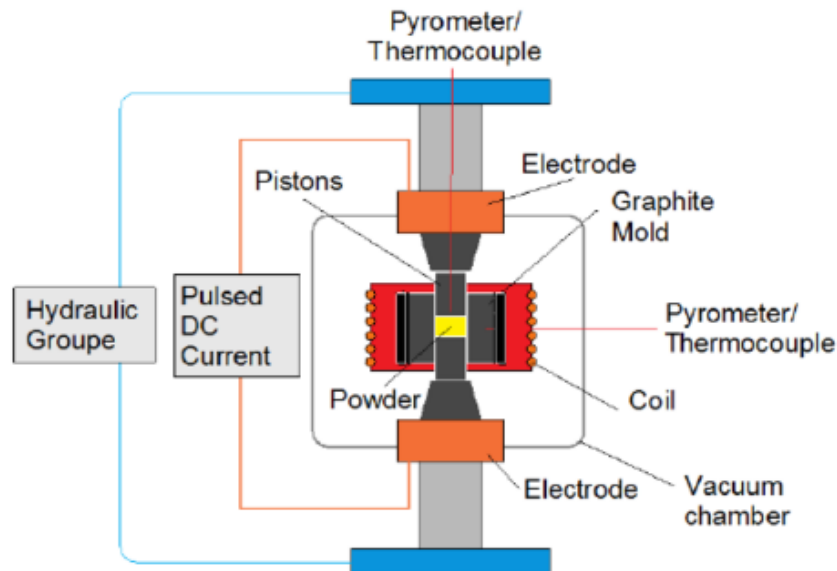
Principal scheme of hot isostatic pressing and sintering in vacuum with pulsed plasma
